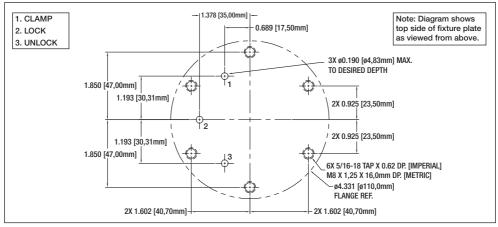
, Mounting Dimensions, Models MPFC-210V, WPFC-210V
